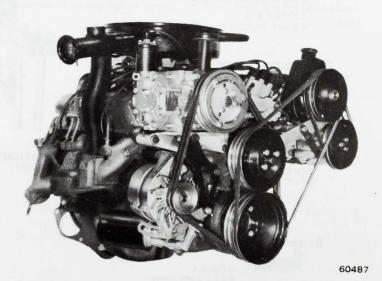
B-123 Typical Eight-Cylinder Engine Assembly
